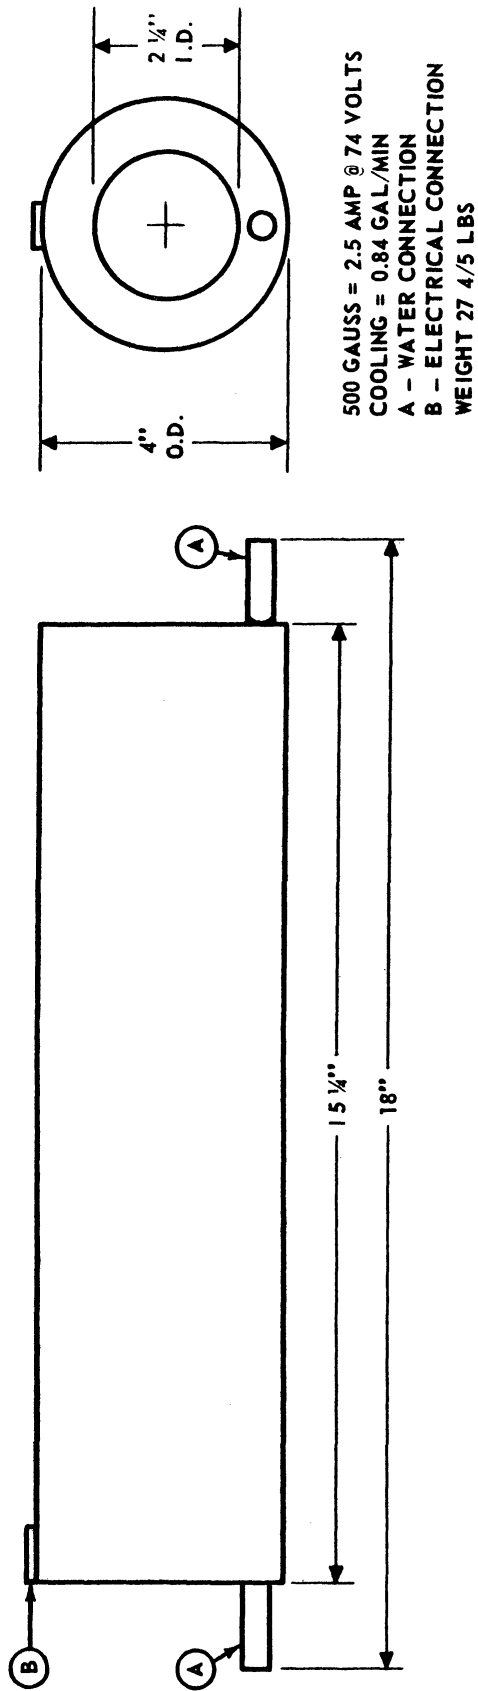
TW-148 SOLENOID, TYPE 9.
